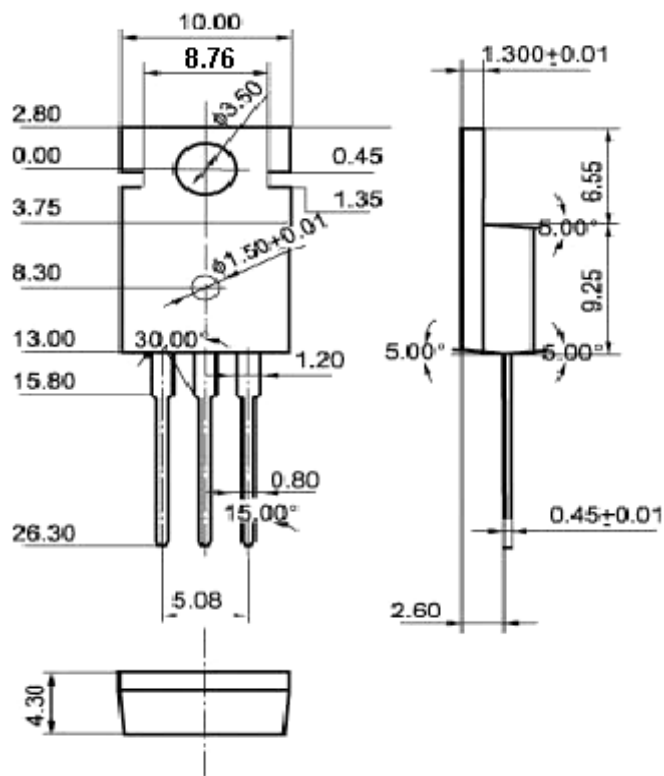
Outline dimensions(unindicated tolerance: ± 0.10 mm)
